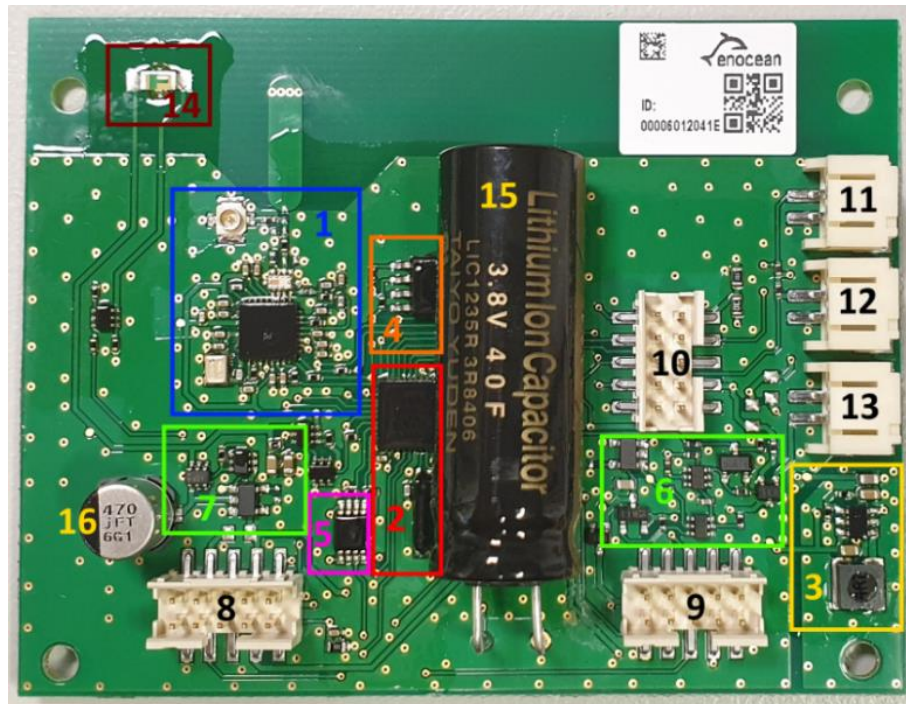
Top side of the assembled sensor module PCB with the marked components.
